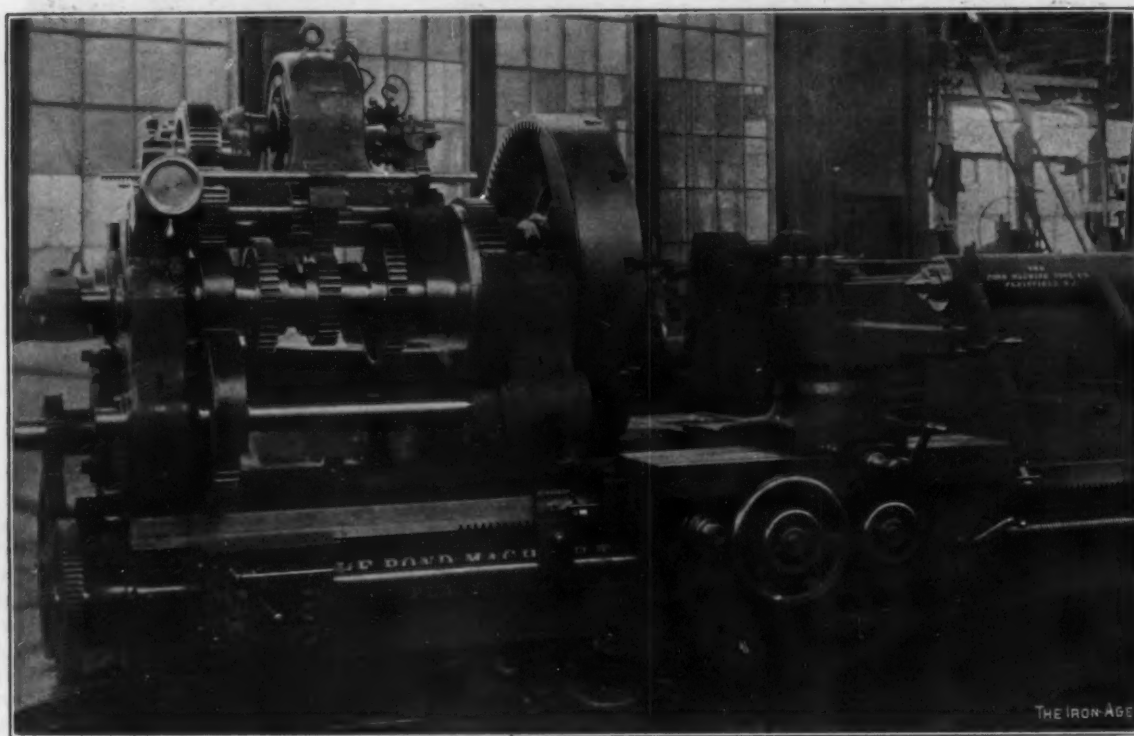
A 54-Inch Pond Lathe with $7\frac{1}{2}$ Horse-Power Westinghouse Motor, Furnished to the American Steel & Wire Company, Cleveland, Ohio.
